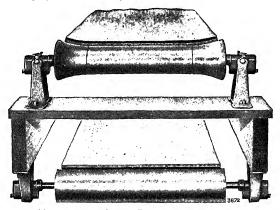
Pressed Steel Roll for Belt Conveyor.
